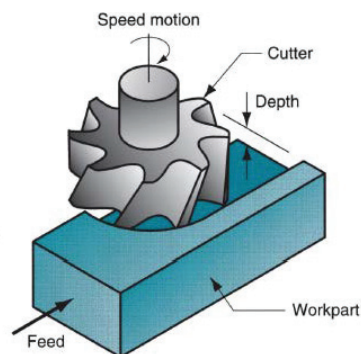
The face milling process where a rotating multiple-edged cutting tool is moved over a fixed surface. Figure from [195].
